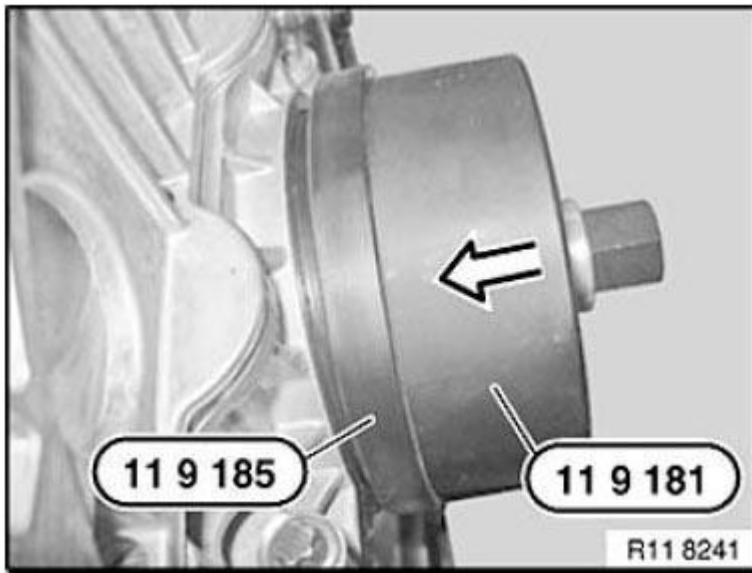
Installing Rear Crankshaft Seal Using Tool 119 180/181
